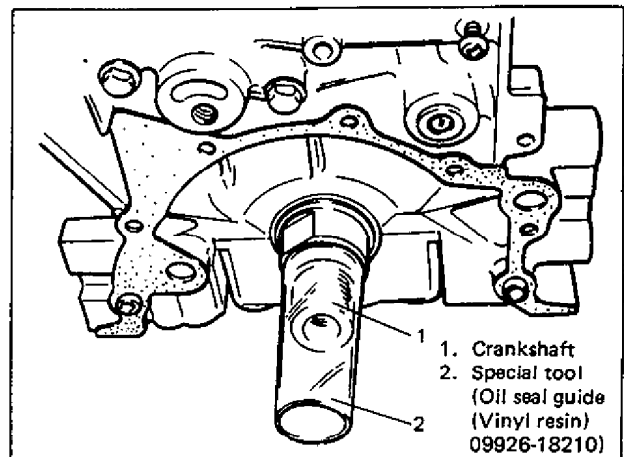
A-53 Special Tool (Oil Seal Guide) Installation
